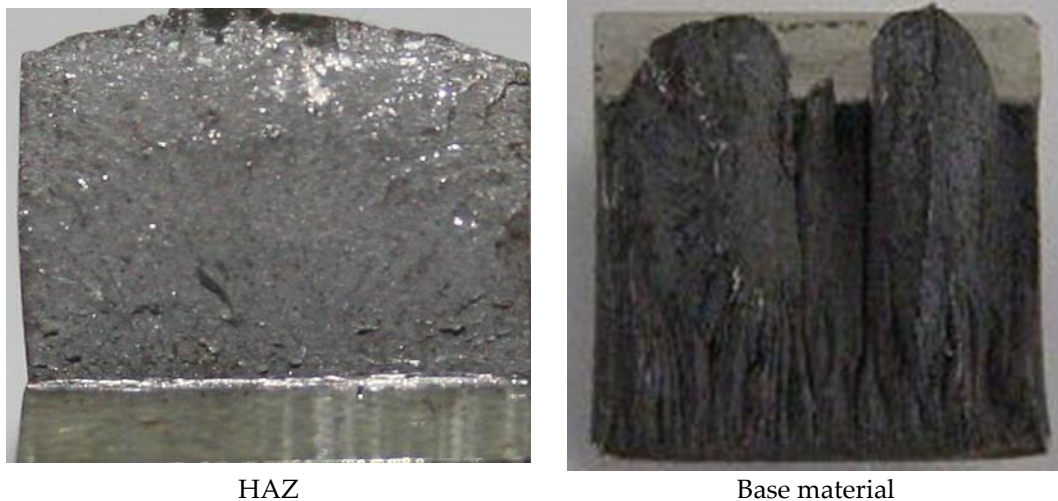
Fractures after the impact test of the S700MC steel laser welded joints in the PC position.
